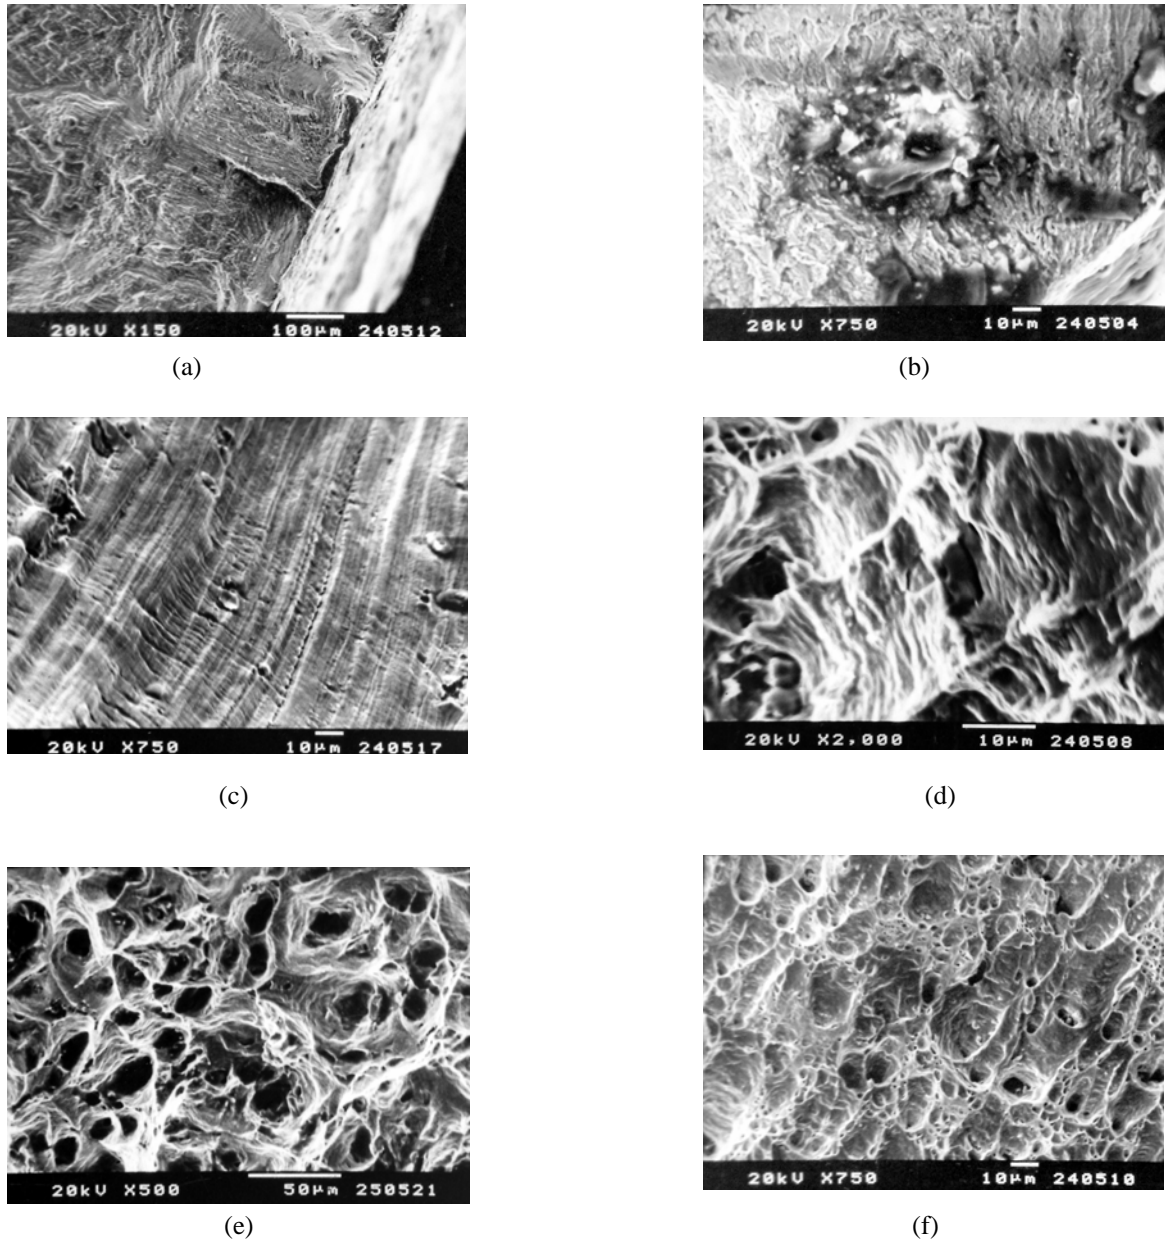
Appearance of fretting scar in a specimen tested at 440 MPa
